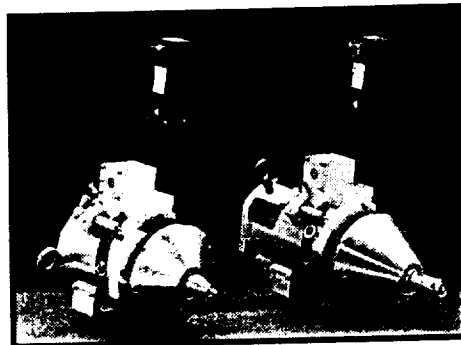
Retractable Pin-Tools for Friction Stir Welding
